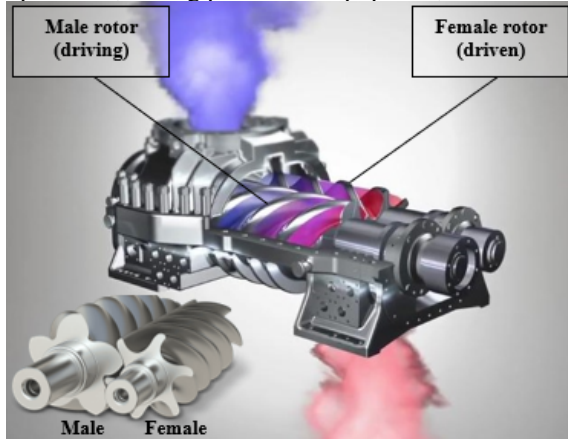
Twin-screw compressor cutaway and rotor profile (from [20]).
